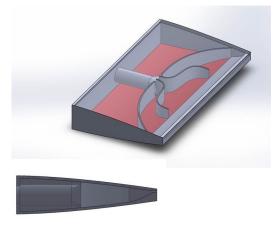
Trimetric and side view of the CAD Design - IV.
